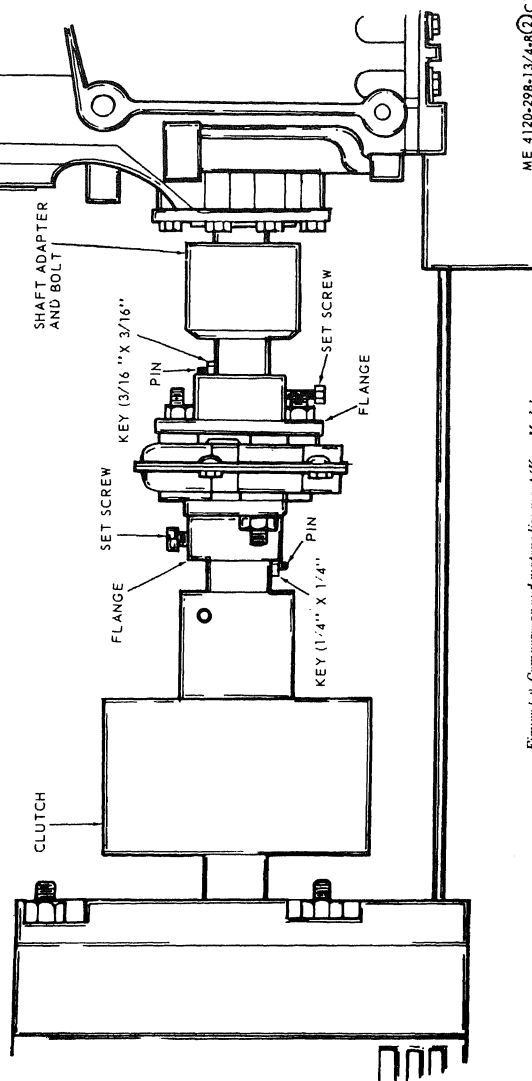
Compressor and motor alignment (Keco Model F18000-6, MECOM Model F18000-5MEC and MECOM Model G18000-5MEC) (Sheet 2 of 2).
